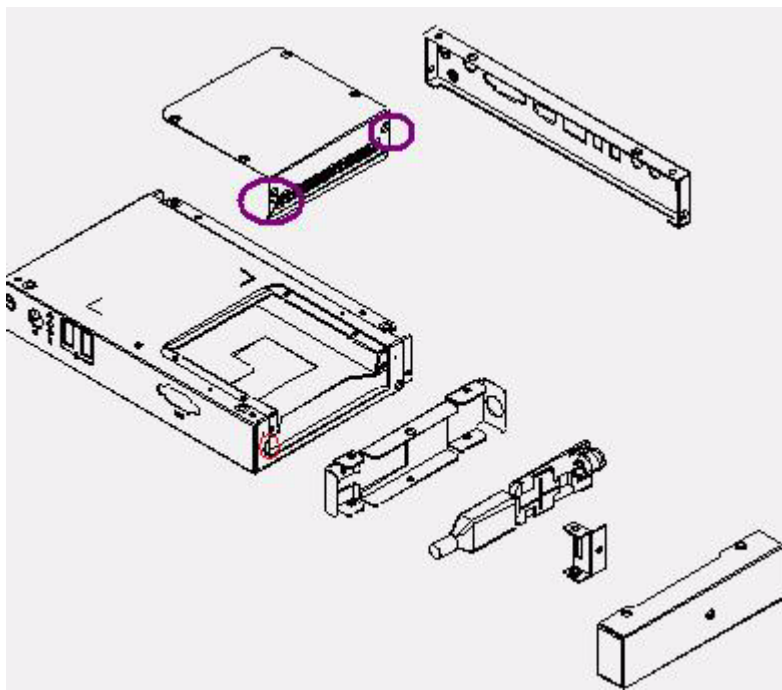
Screw the TV tuner card and TV tuner cover.
